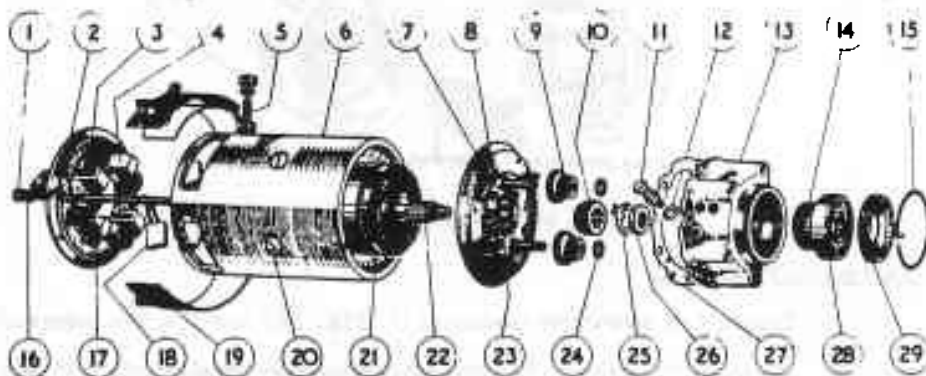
STARTER MOTOR AND REDUCTION GEAR.
